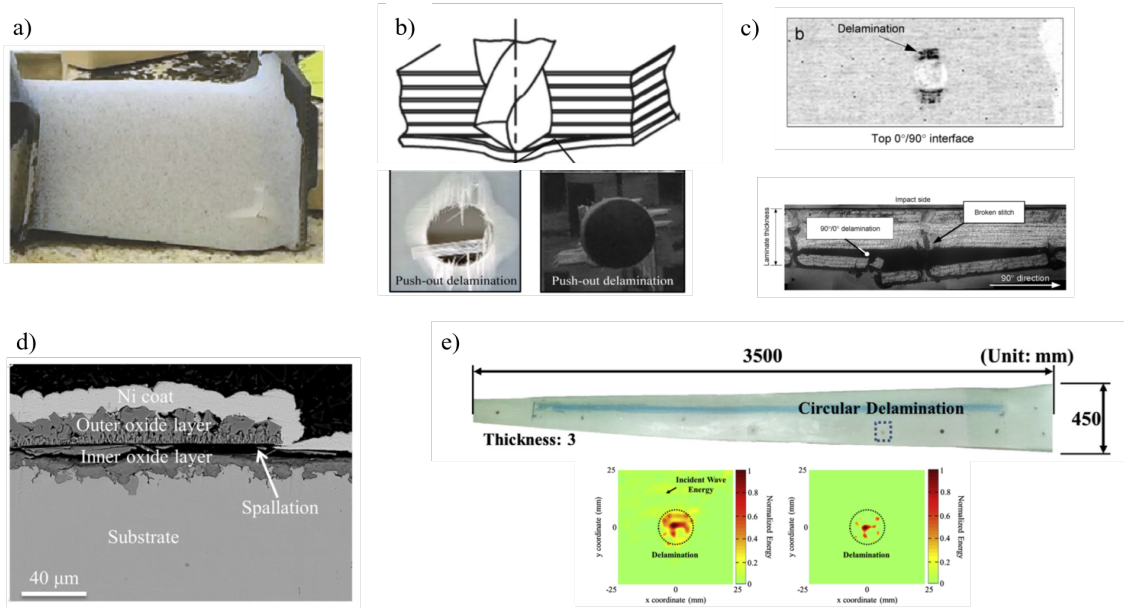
One-dimensional fractures: (a) coating blister on aero-engine turbine blades [5] Reproduced with permission from Yuan et al. , Theor. Appl. Mech. Lett., 8, 2018 © Elsevier; (b) drilling-induced push-out delaminations [6] Reproduced with permission from Deng et al. , Compos. Struct., 216, 2019 © Elsevier; (c) delamination of CFRP under impact [7] Reproduced with permission from Aymerich and Priolo, Int. J. Impact Eng., 35, 2008 © Elsevier; (d) Spallation of a thin layer [8] Reproduced with permission from Behnamian et al., J. Supercrit. Fluids, 119, 2017 © Elsevier; (e) delamination in wind turbine blade [9] Reproduced with permission from Park and Sohn, Compos. Sci. Technol, 100, 2014 © Elsevier
